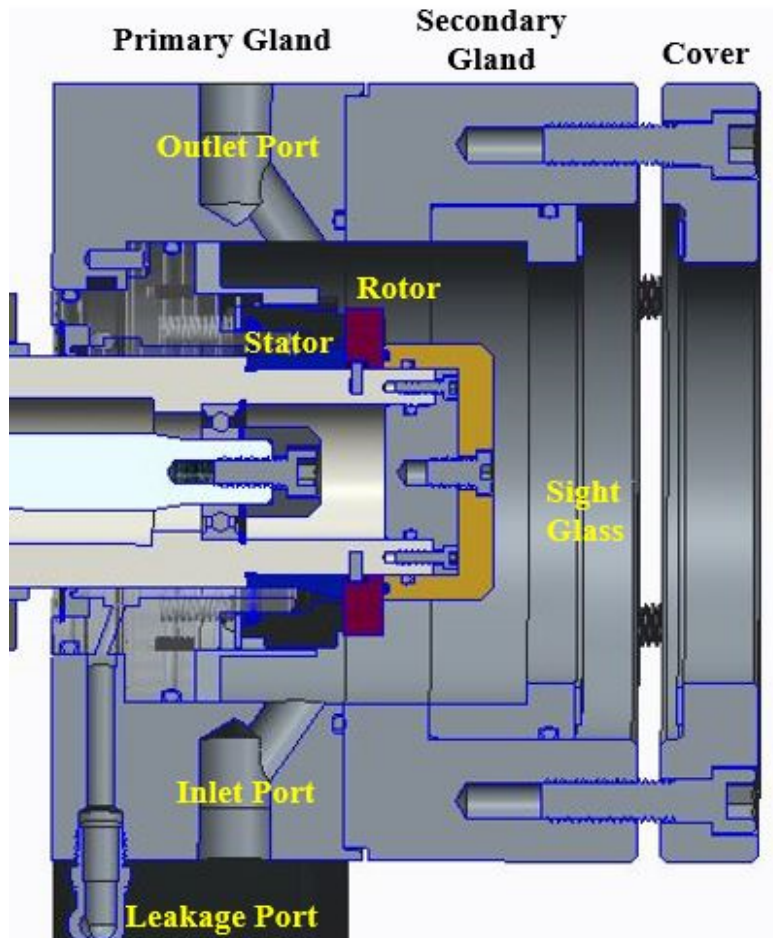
Labeled section view of the internal pressure vessel and seal assembly
